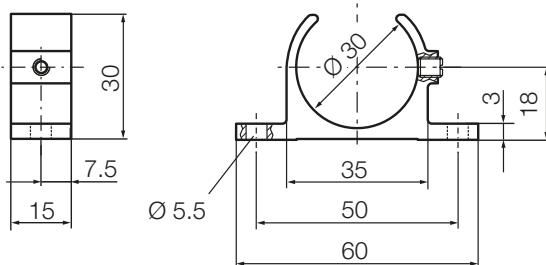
Mounting bracket BTL6-A-MF01-A-50
